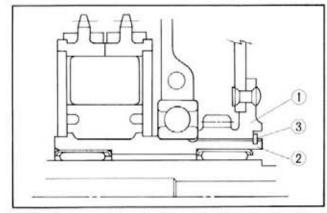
(1) Clutch outer (3) 40mm snap ring (2) Primary driven sprocket
